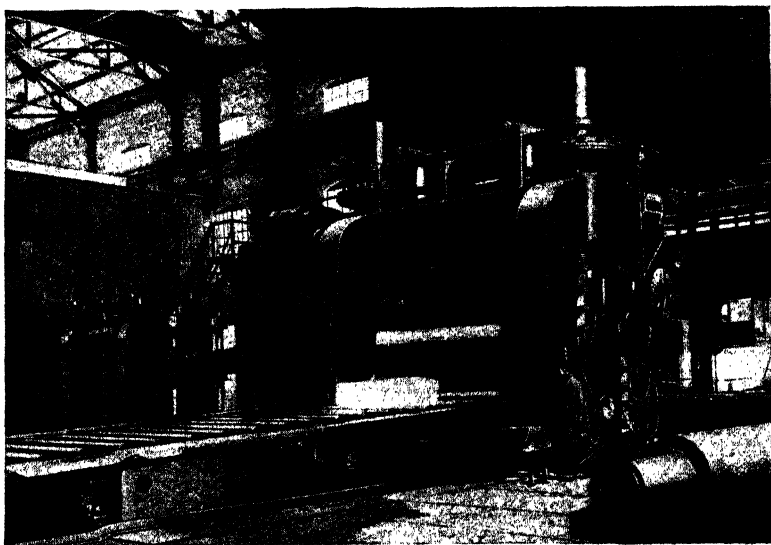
XI.—A sheared plate mill in operation (upper pass). (*Courtesy of The Mesta Machine Co.*)
